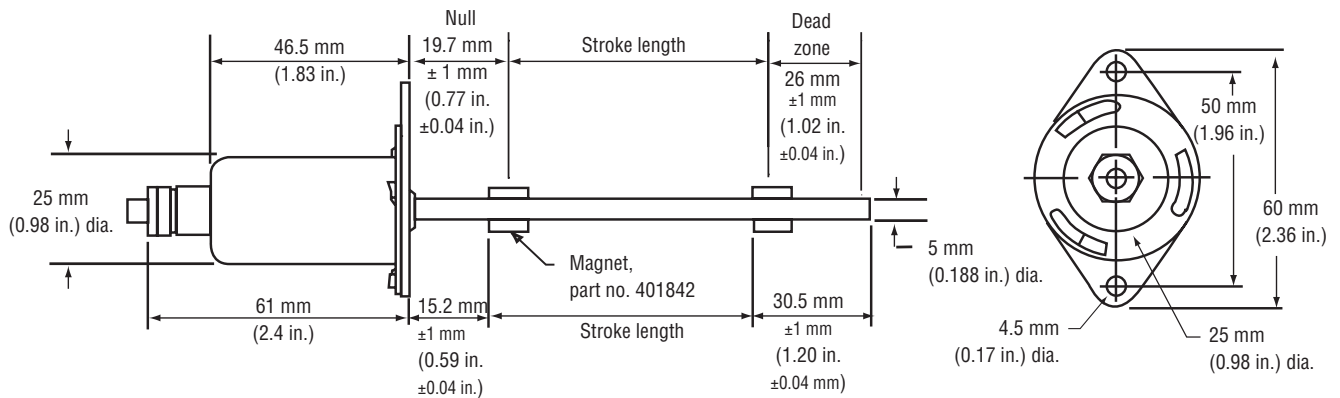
C-Series Core sensor, Models CS/CM (with IP 67 H2 housing option) dimension references
